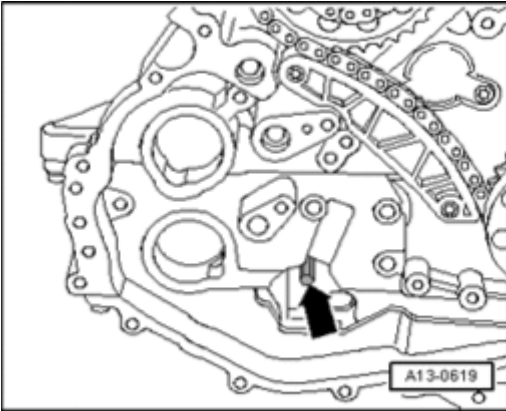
Removing/Installing Drive Shaft For Oil Pump
